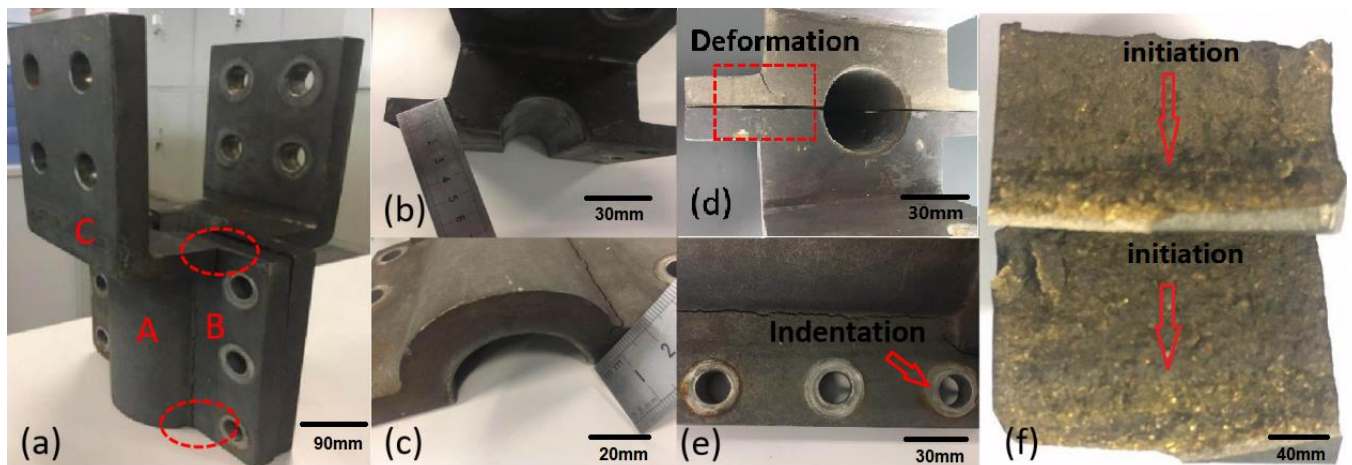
(a) Macro-appearance, (b,c) crack depth, (d) deformation, (e) indentation, and (f) fracture of the failed clamp.
